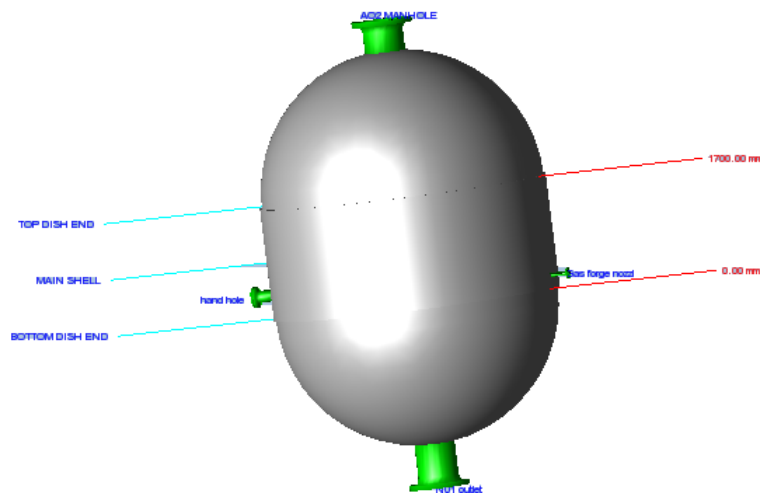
Parts of Gaurd Drier(Pressure Vessel)
